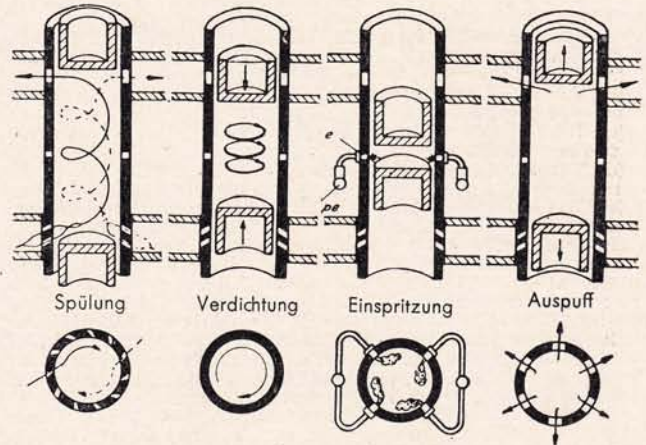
How the Junkers two-piston two-stroke motor works. Spülung= scavenging; Verdichtung= compression; Einspritzung= injection; Auspuff= exhaust.
